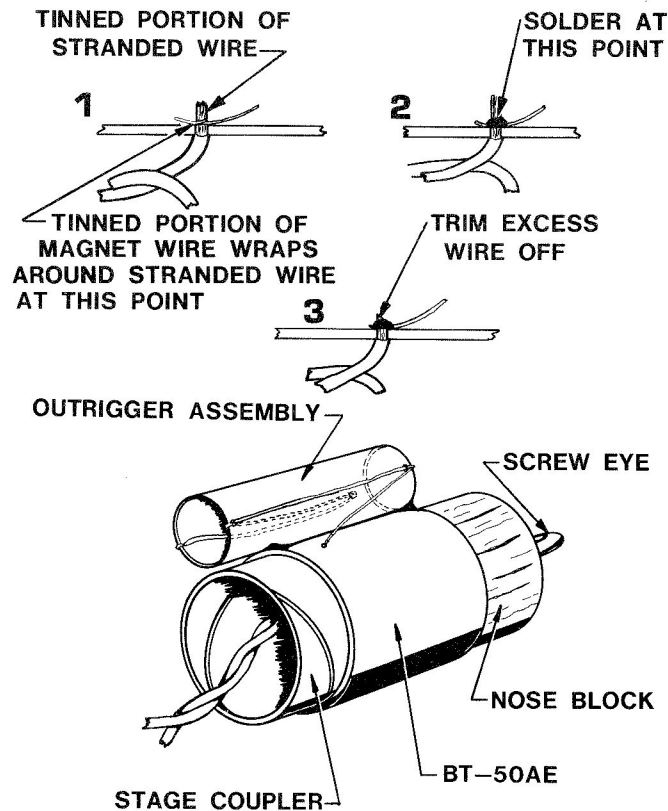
ASSEMBLY OF THE THERMISTOR MOUNT
